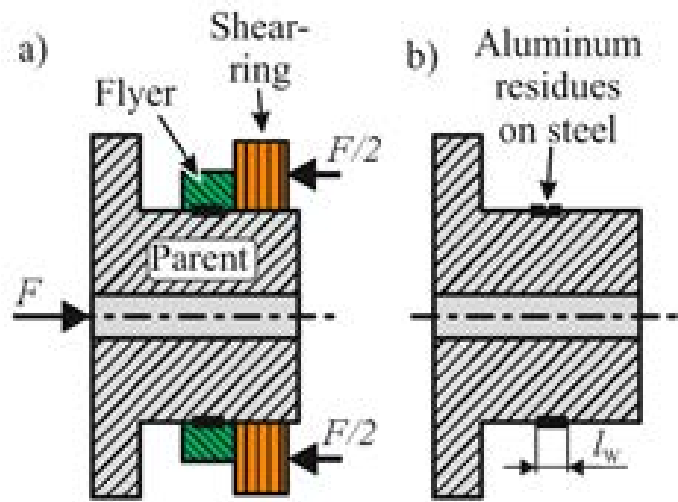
a) Shear test and b) evaluation of the weld length l_w
